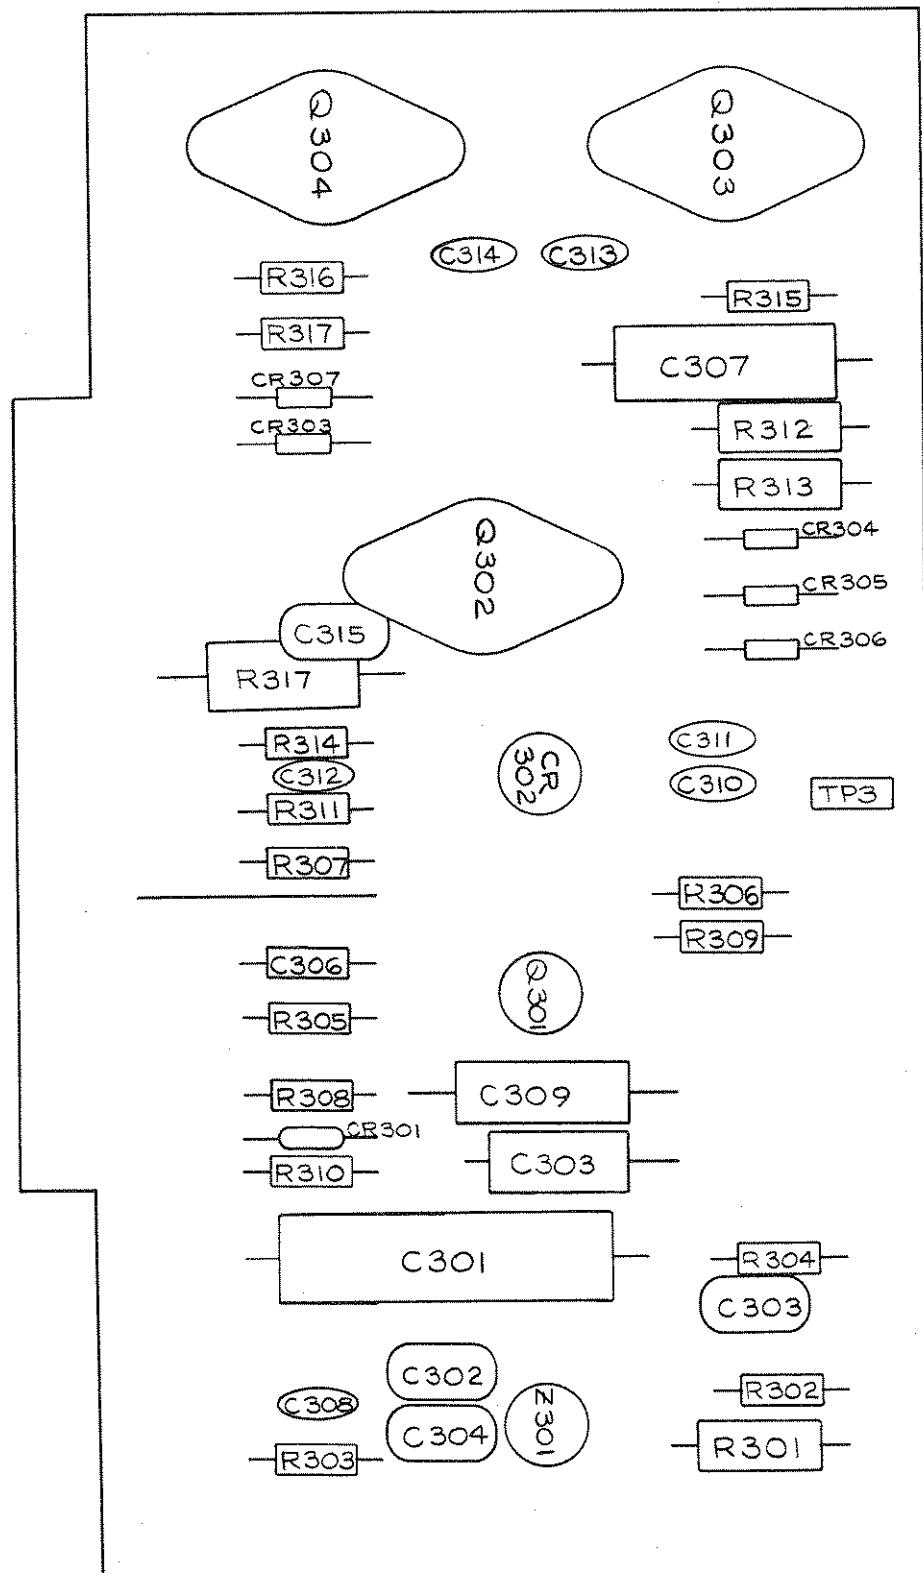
AMPLIFIER BOARD ASSEMBLY, MODEL 6004B
